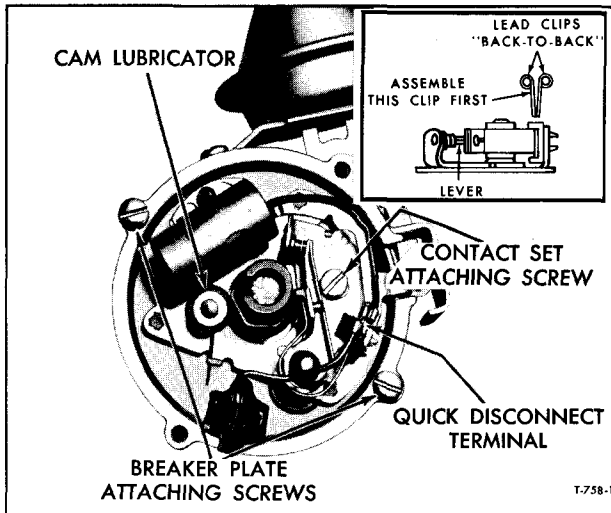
Breaker Plate Attaching Parts (V6 Engine)
